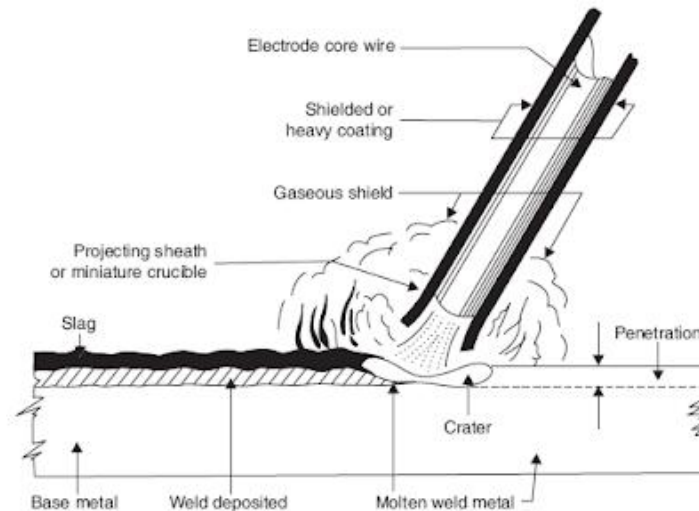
Representing the overview about the Arc Welding [Match Tech].
